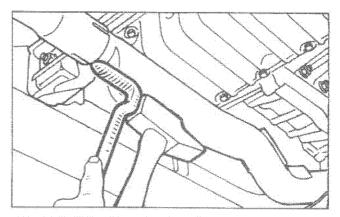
Using shaped tool to disconnect exhaust pipe
